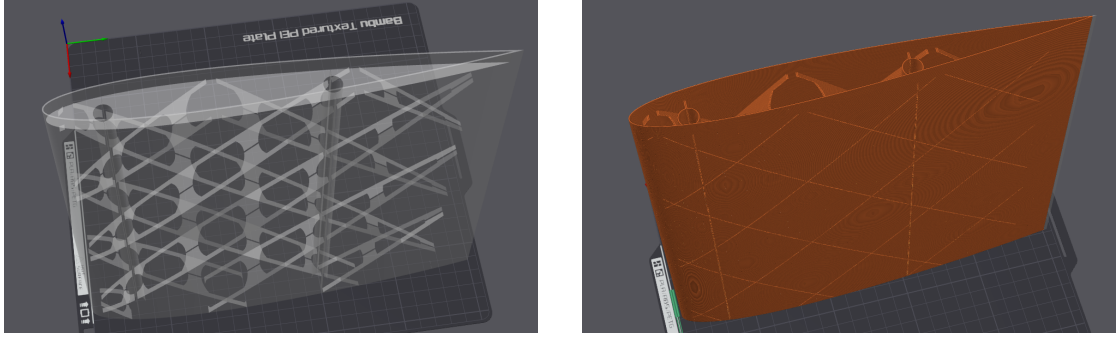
Wing structure and manufacturing: (left) CAD model showing the hollow internal geometry with channels for carbon fiber spars, (right) sliced preview in vase mode showing the continuous spiral toolpath that eliminates retractions and produces a clean aerodynamic surface.
